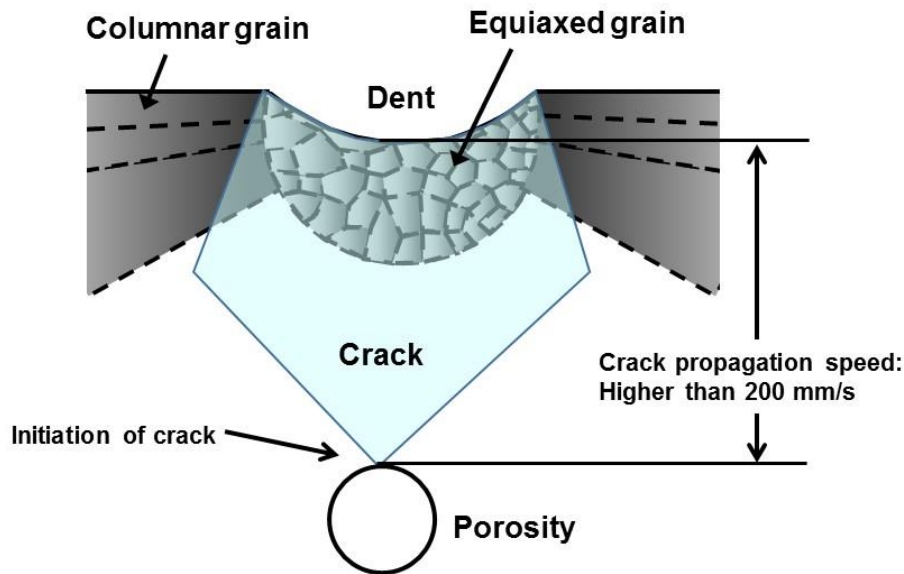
Schematic illustration for hot crack propagation of inside of laser spot welding with A5083.
